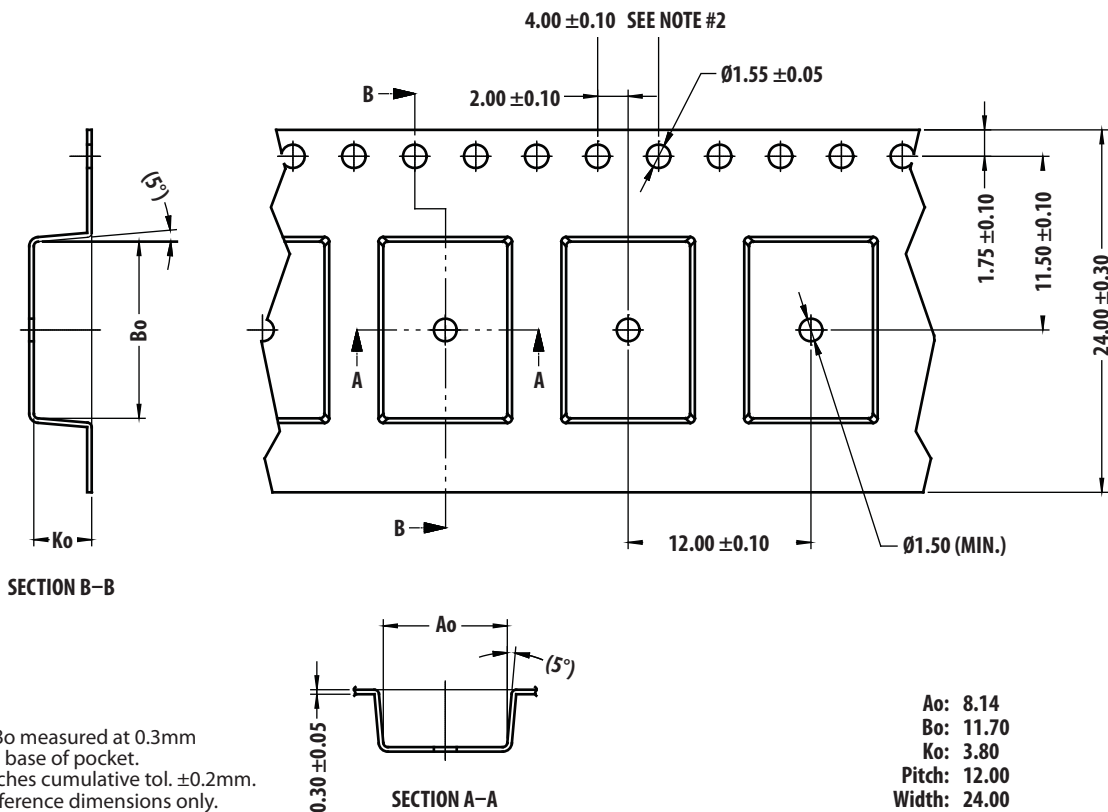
ADNS-7630-TR Tape and Reel Packaging Dimension
